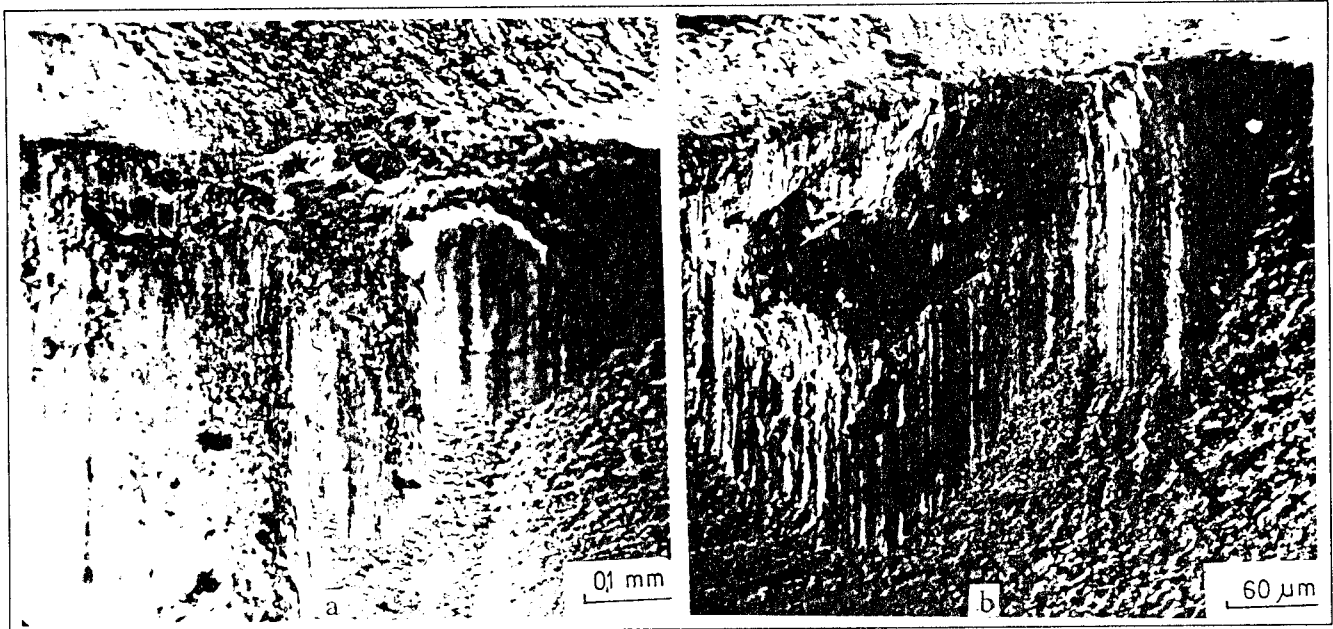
Oxidation and abrasive wear a) cracking across the nose; b) fracture on flank face
